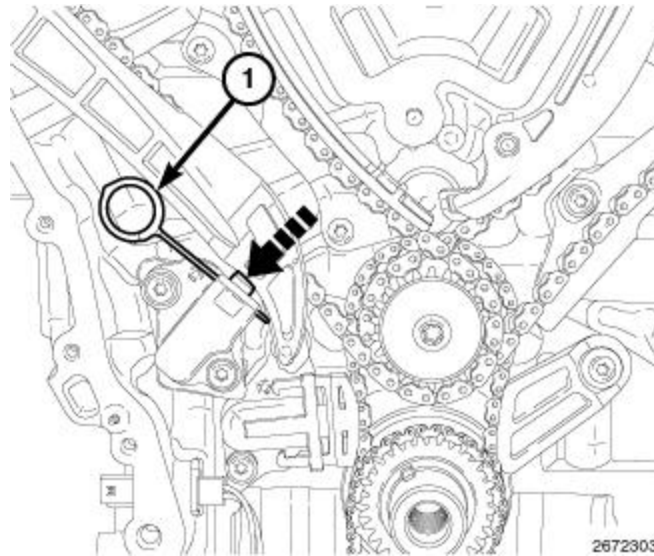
Resetting Right Cam Chain Tensioner By Pushing Back Tensioner Piston & Installing Tensioner Pin
